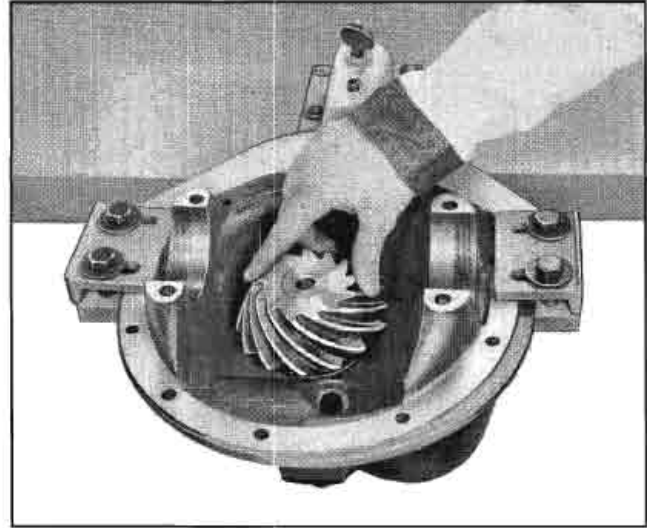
Checking Pinion Rear Bearing for Roughness
